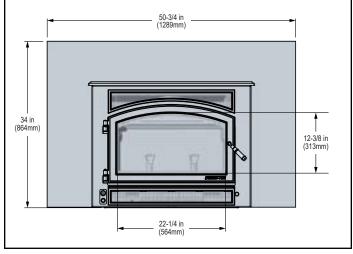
Front View with Large Flat Surround (SP2-5134)
